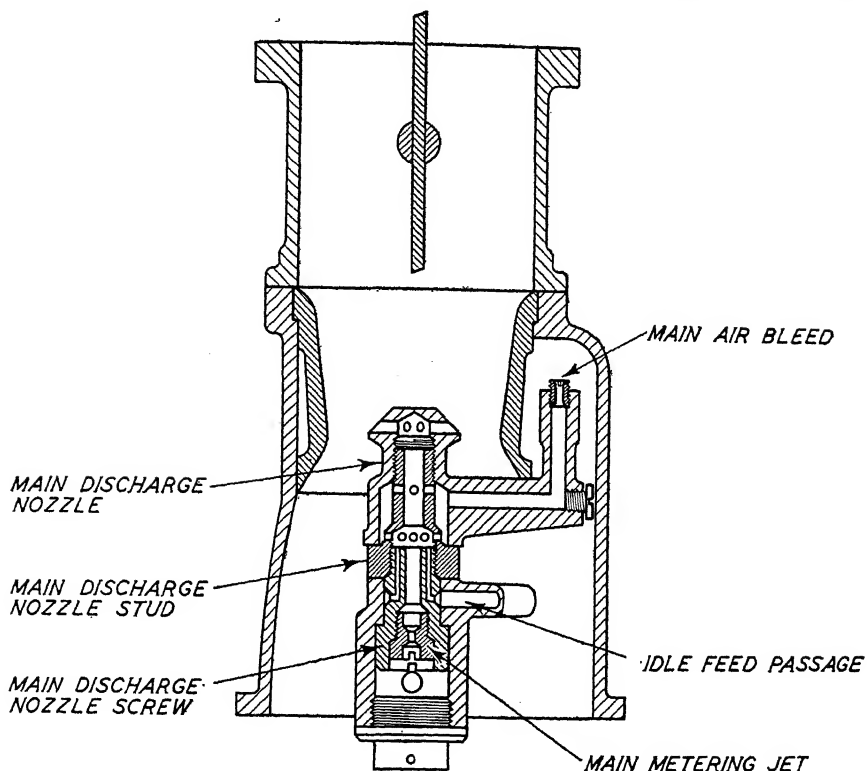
THREE-PIECE MAIN DISCHARGE ASSEMBLY
